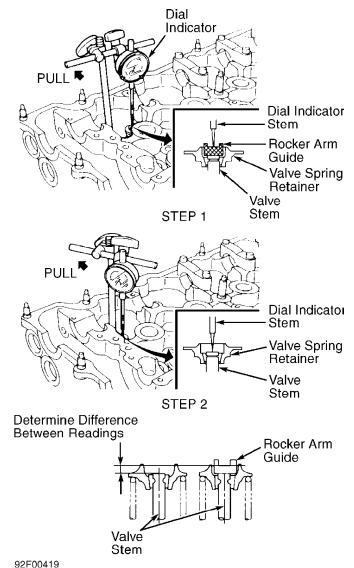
Measuring Valve Clearance Courtesy of Nissan Motor Co., U.S.A.
